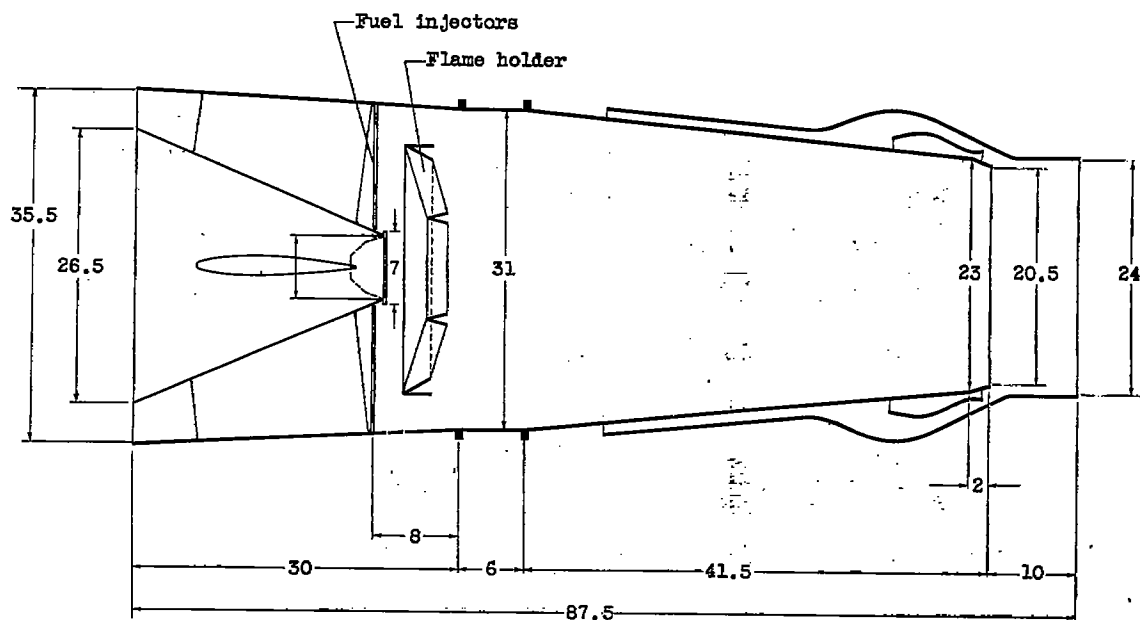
Schematic drawing of engine and tail-pipe burner in altitude chamber.
